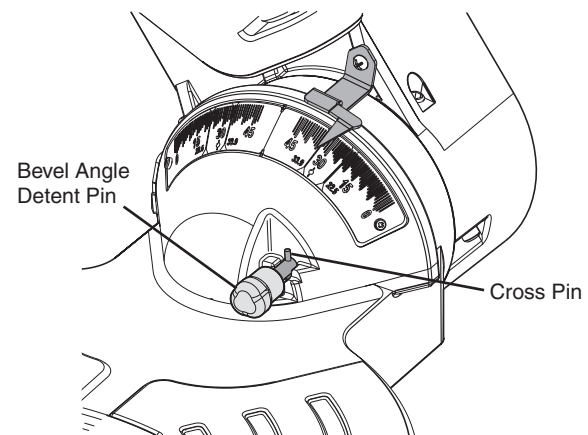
Cross Pin Engaged for 33.9° Bevel Cut
